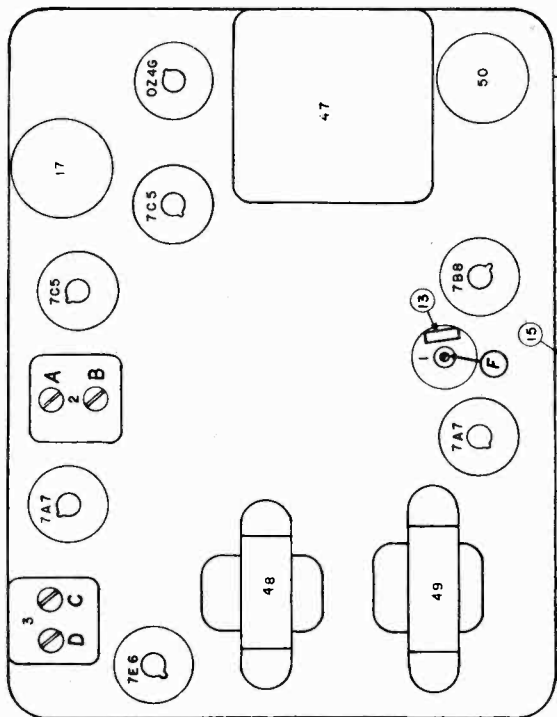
Parts Layout-Top View-Cadillac 1940 Rear Compartment Radio
